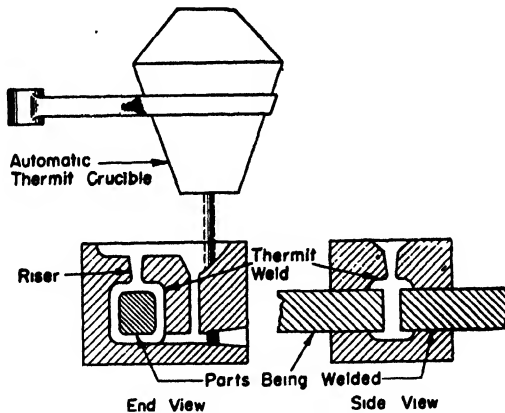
Sketch of a crucible and mold for Thermit welding.
